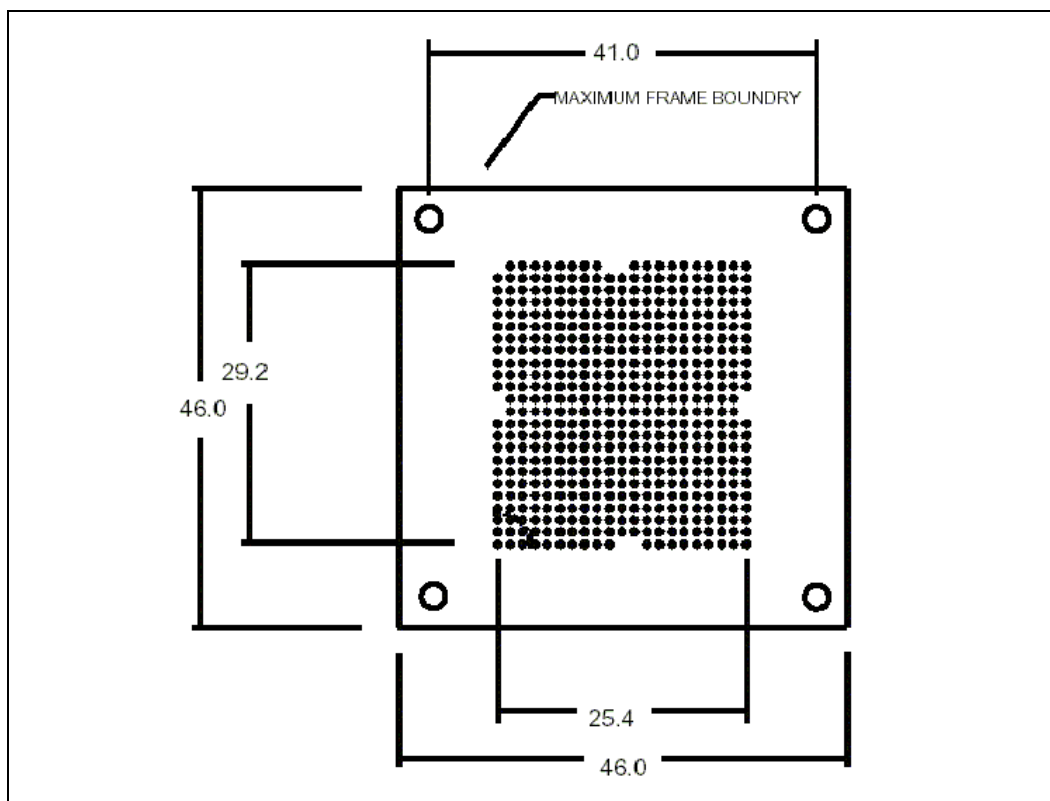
Baseboard Keepout Zone for the Micro-BGA Package, Primary Side
